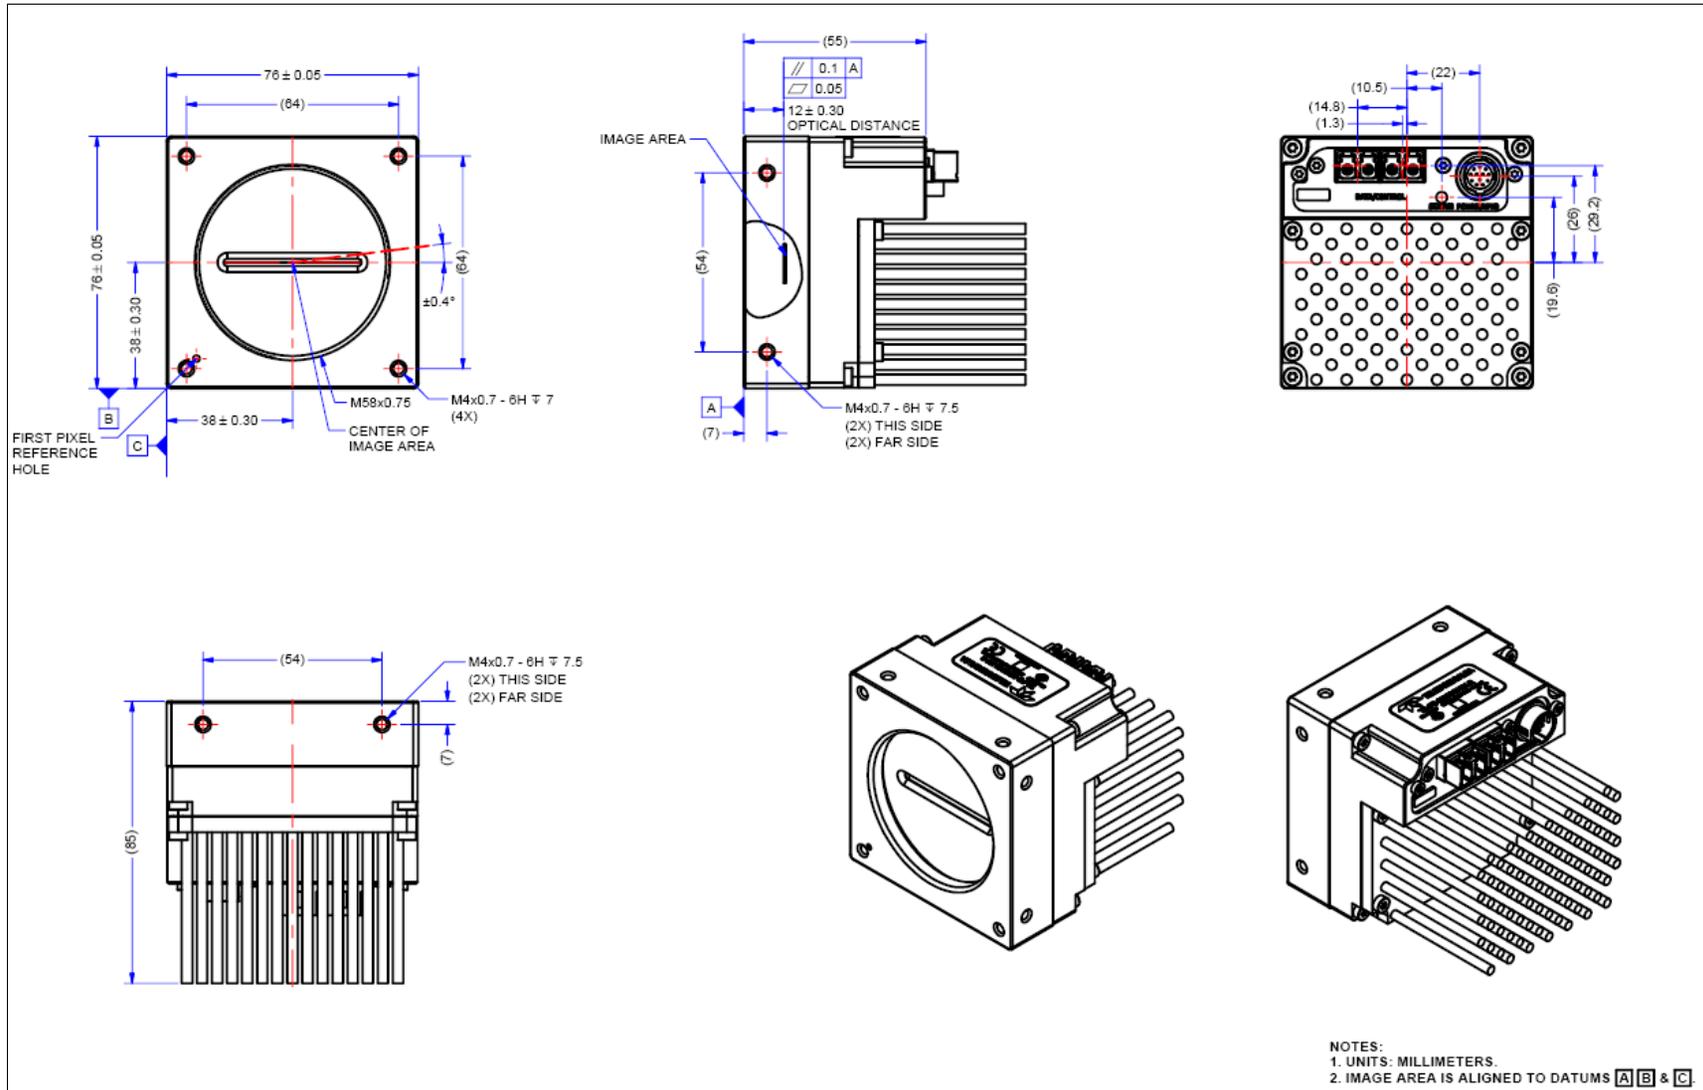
HL-FM-08K30H-00-R Mechanical Drawing
